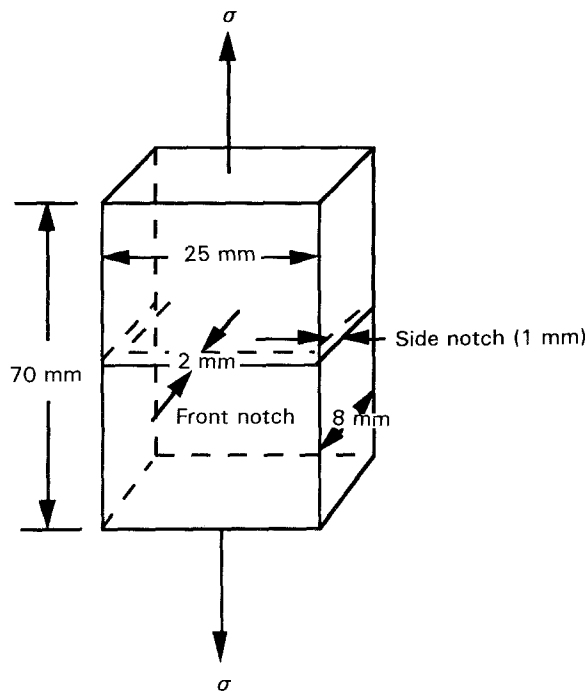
Shape and dimensions of the single-edge notched tensile specimen.
